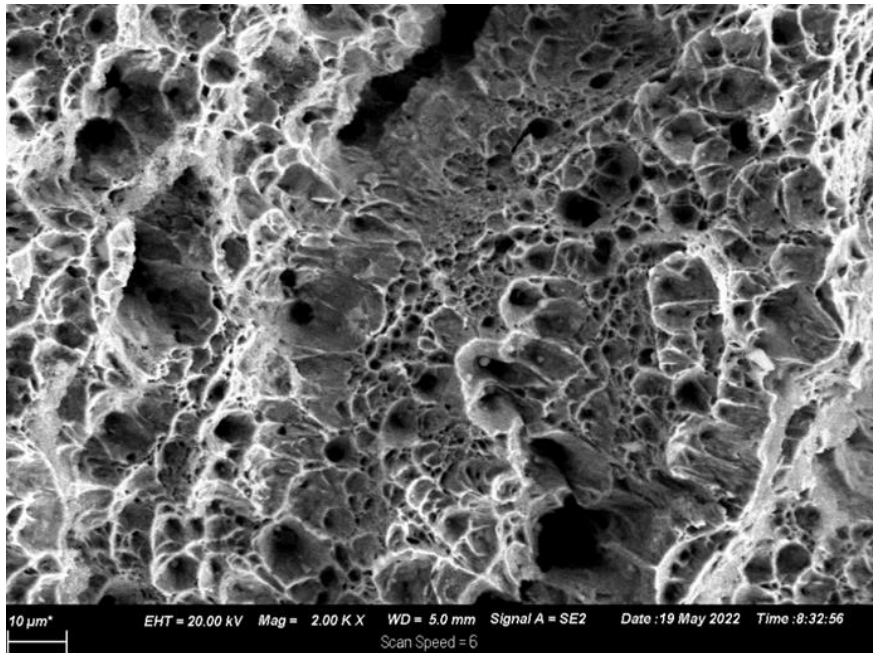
Enlarged magnified sheered bolt. (Source: University of Pretoria)
